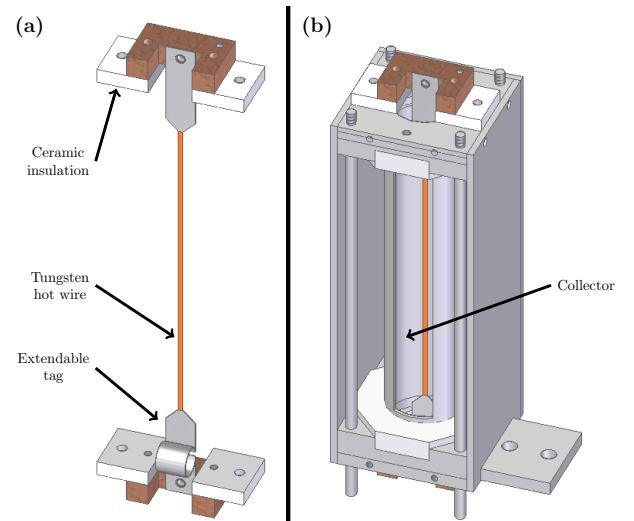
(a) Bare tungsten hot wire and (b) the fully assembled SIA. The tungsten hot wire is spot welded onto two molybdenum pieces, one of which is extendable to accommodate any change in strain resulting from the thermal expansion of the hot wire. The hot wire is surrounded by a cylindrical stainless steel ion detector (collector) with a lateral rectangular opening to allow the atomic beam to impinge on the hot wire. Custom-machined ceramic parts were used to isolate the hot wire and collector from the grounded frame on the exterior of the SIA.
